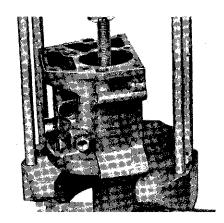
Pressing Cylinder Head out of Valve Housing
